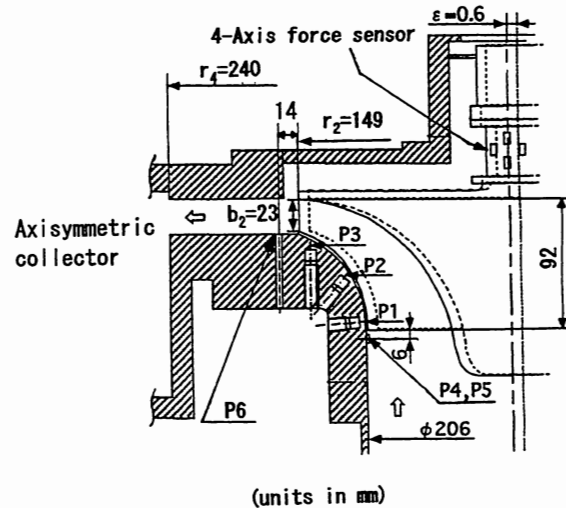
Cross section of the test rig (impeller, casing and instrumented shaft)
